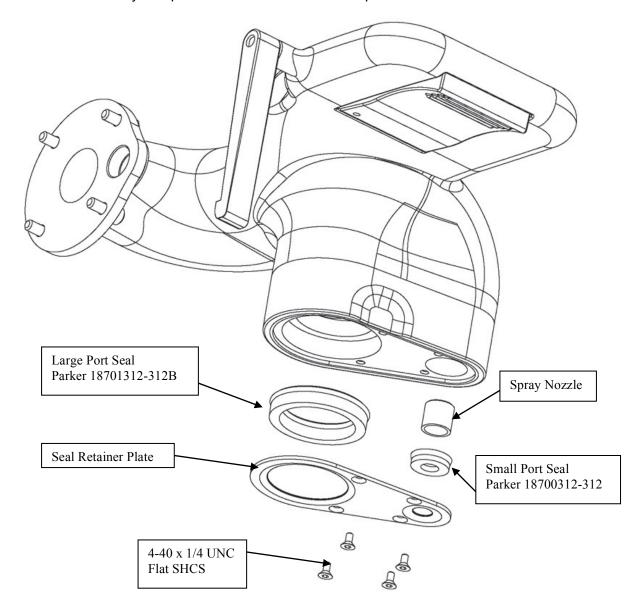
Exploded View of Seals In Quick-Drain HF Drainhead
